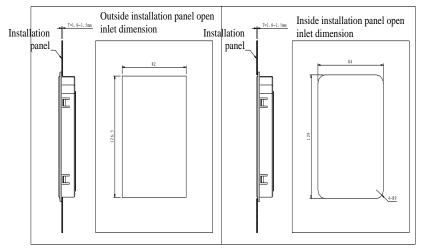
PI500 keyboard installation open inlet dimension(mm)
